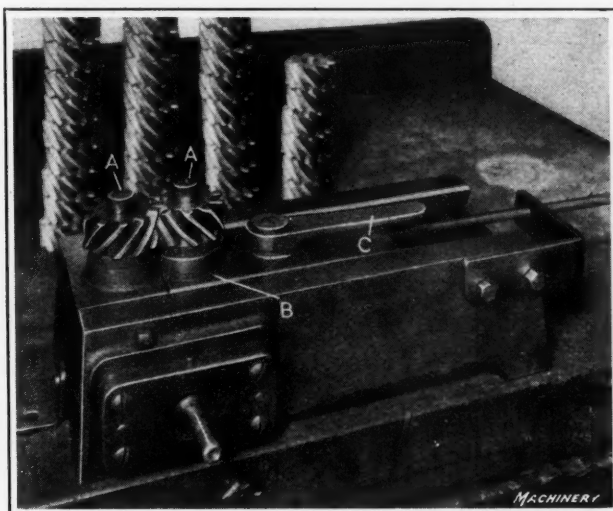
Fixture for testing Running Action of Spiral Gears. Interchangeable Parallel Arbors and Adjustment of the Center Distance provide for testing Various Sizes of Gears on this Fixture
